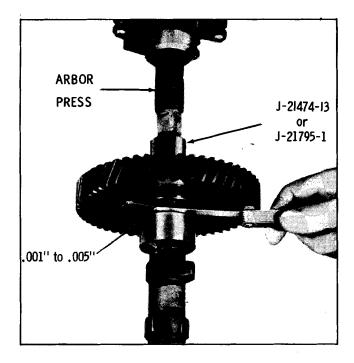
Installing Camshaft Timing Gear and Checking
